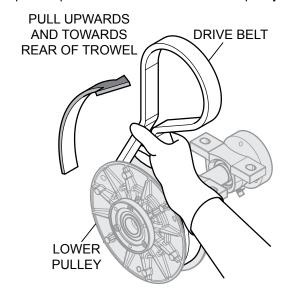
Spare Drive Belt Placement (Lower Pulley)
